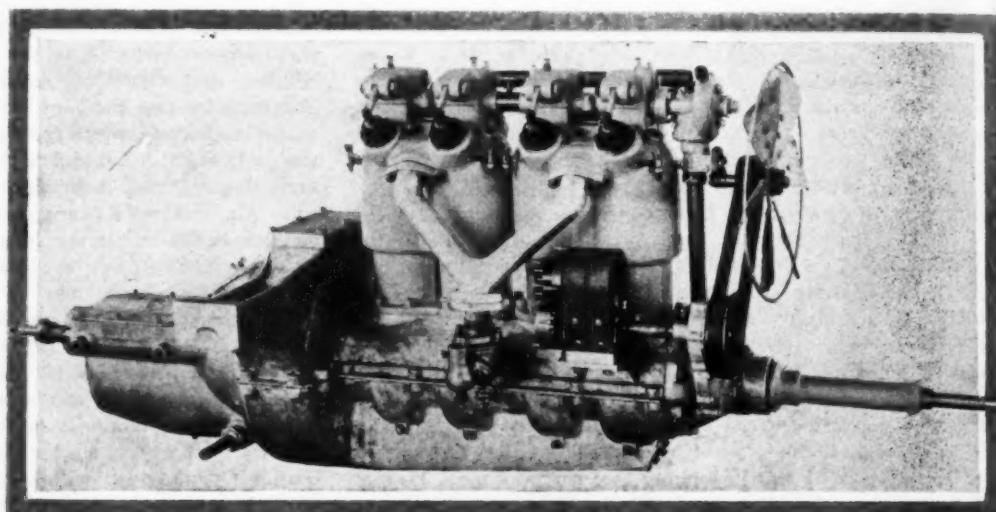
Model 40 motor looking at intake side, showing carburetor, magneto, fan and cranking extension
